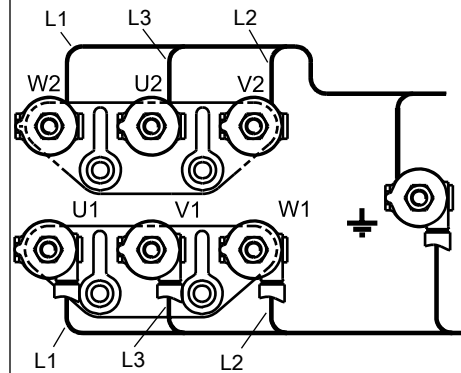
Drive units 605/615, 665/675; 705/715, 735/745, 765/775
